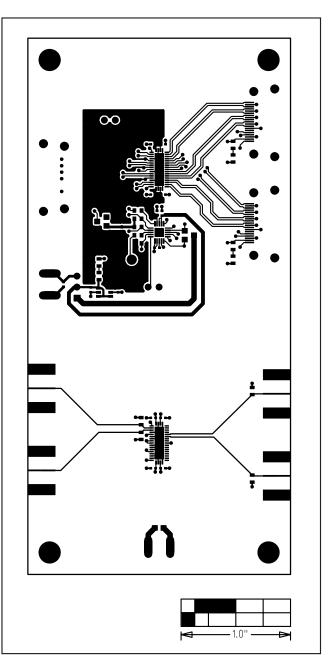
MAX4886 EV Kit PCB Layout—Component Side
